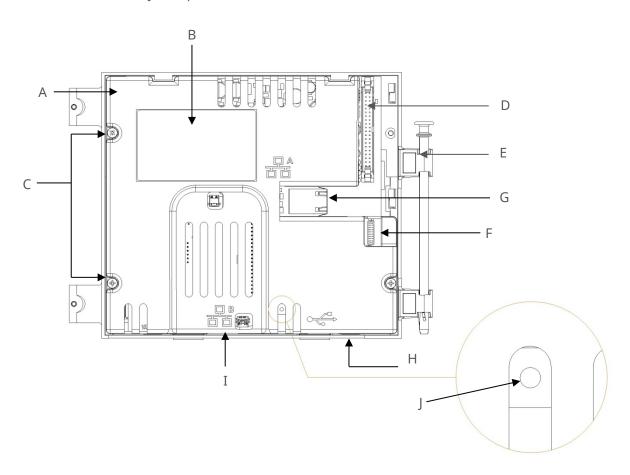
Cirrus CCD Front Door Assembly Components
